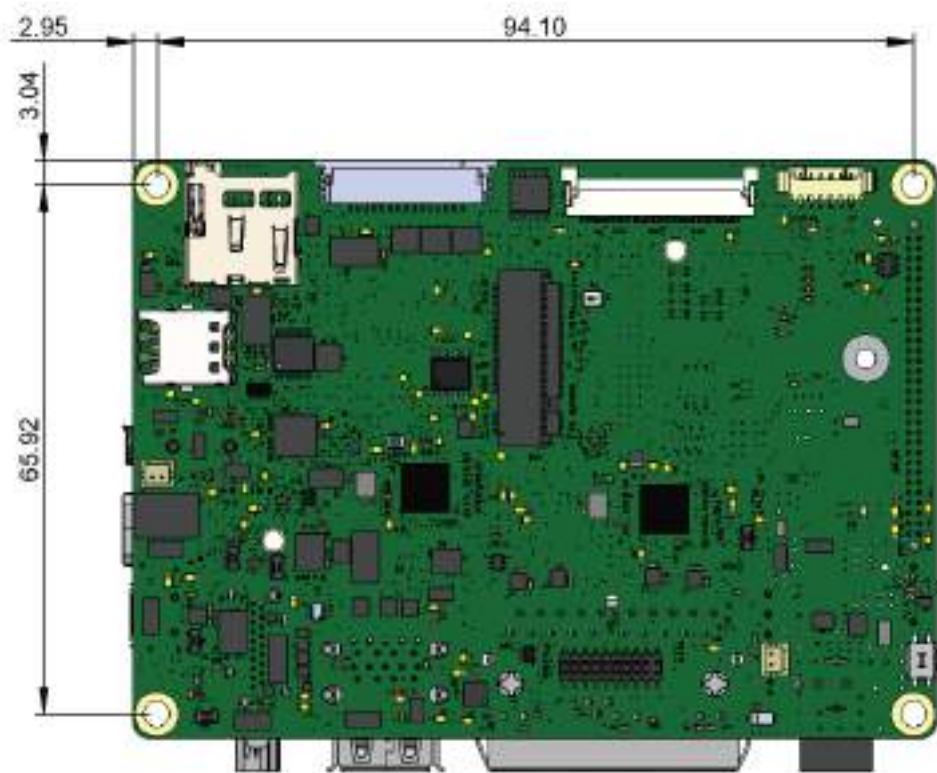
Mechanical Dimensions of i.MX 8XLite Pico ITX SBC Bottom View
